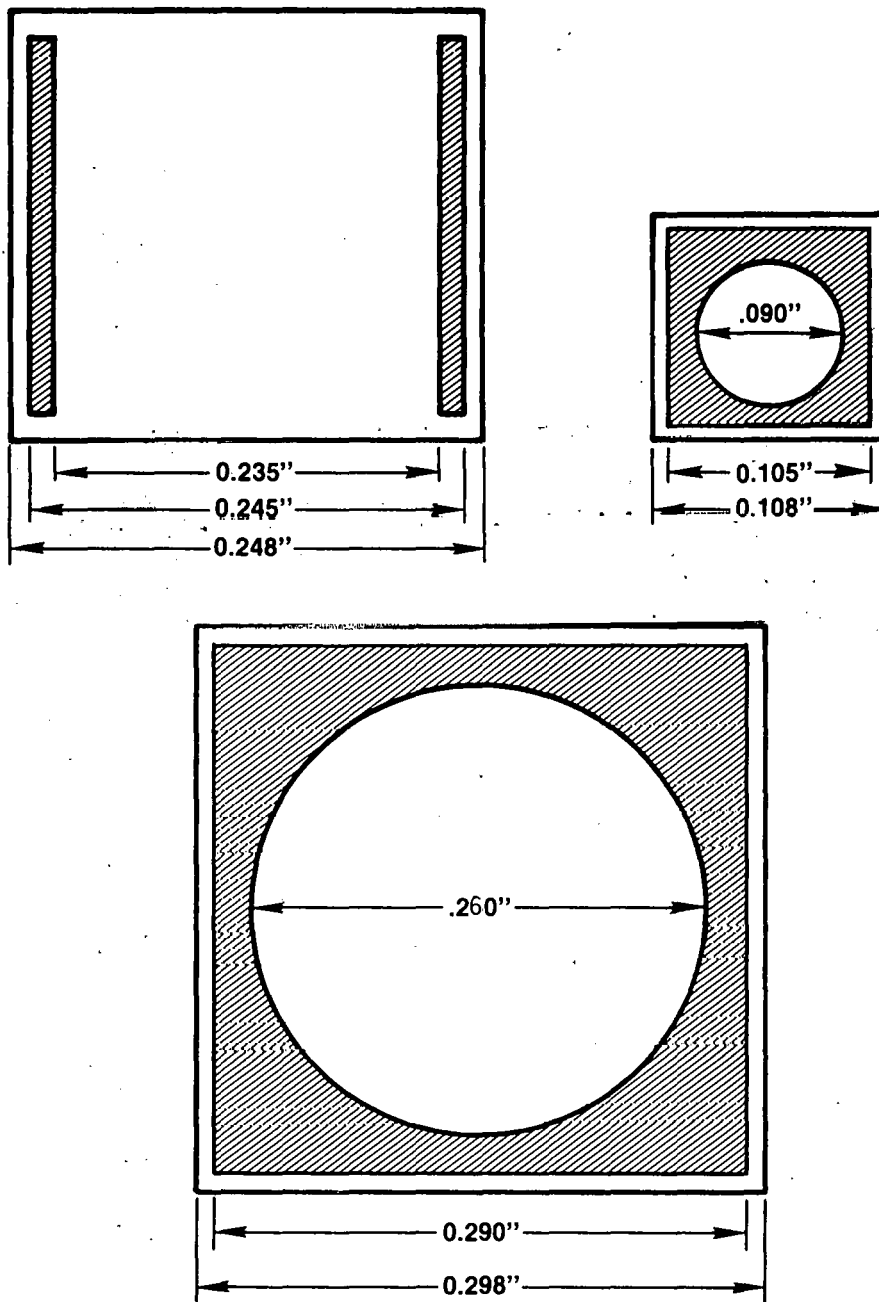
TOP SURFACE LAYOUT AND SIZE OF TEST CELLS
